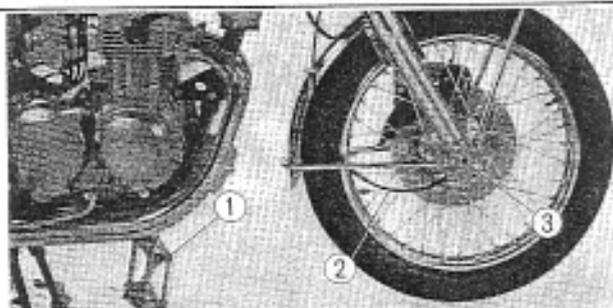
① Jack ② Speedometer cable ③ Axle holder
